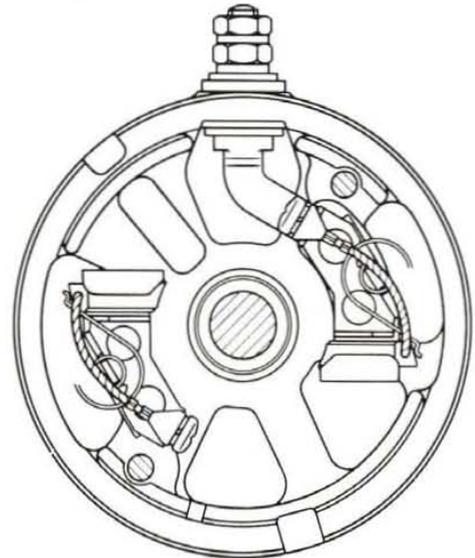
End sectional view of generator across armature shaft and view of commutator end head.
